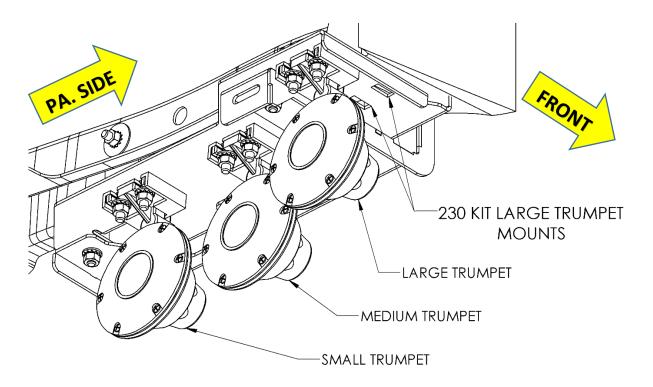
Air Horn Driver Orientation and Mounting Location on Bracket
